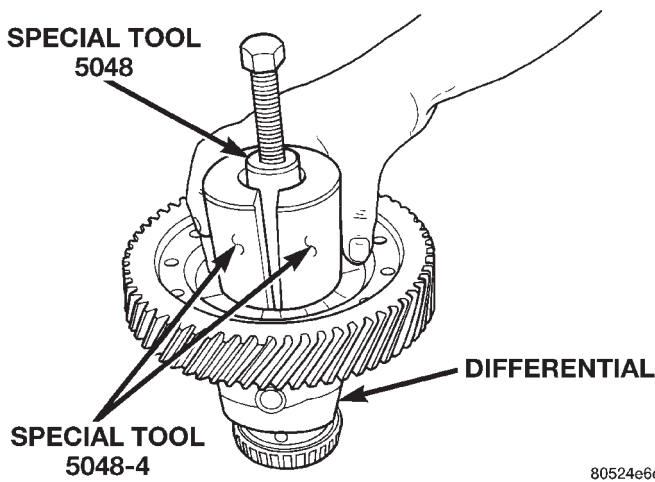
Position Tool 5048 Over Button and Collets at Differential Bearing
